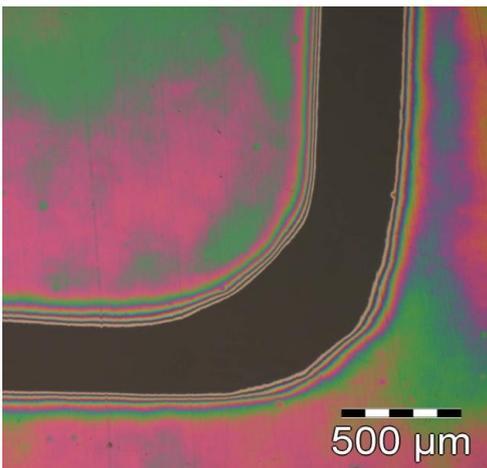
Macrograph of the weld along a corner with IPC
